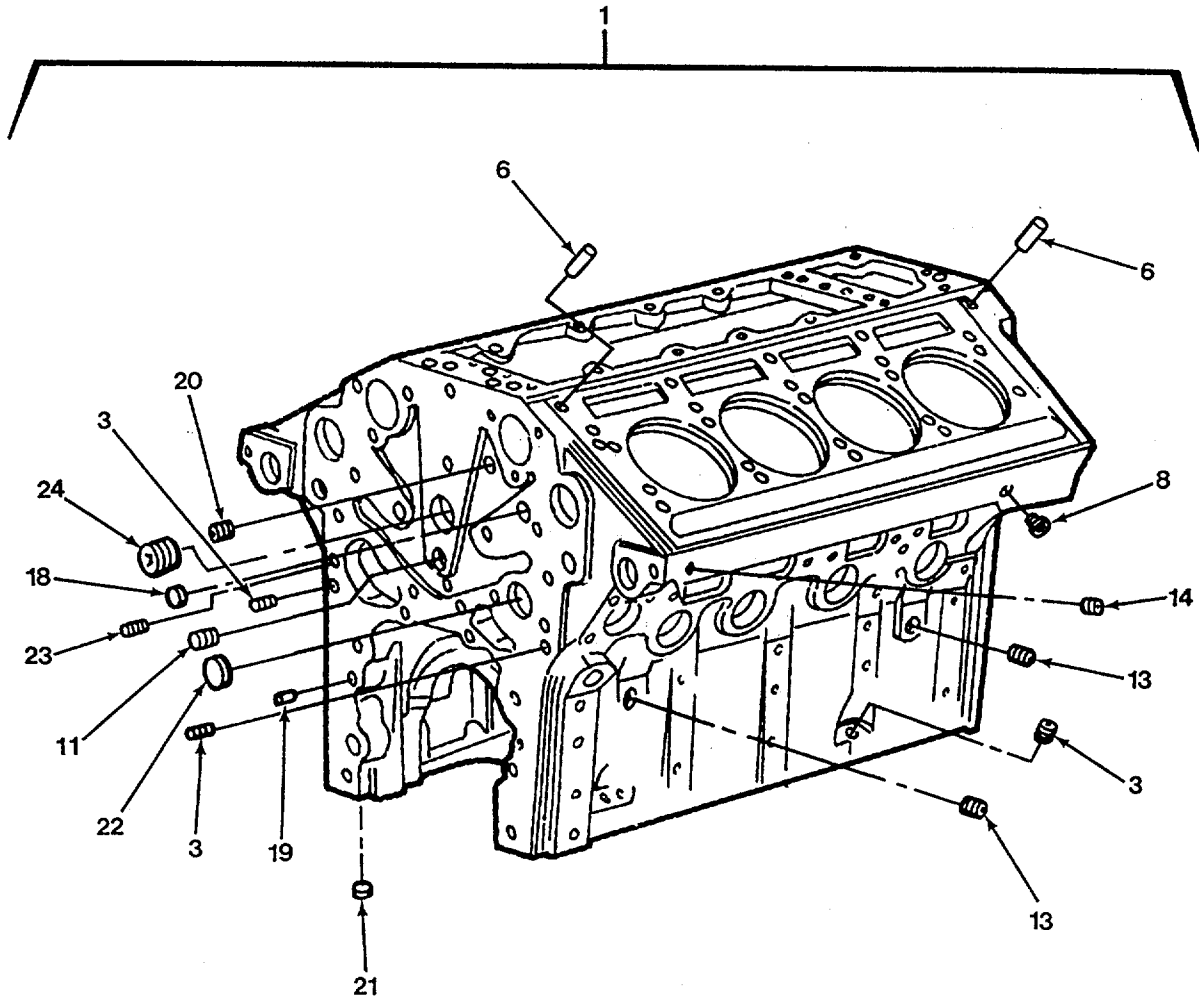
Cylinder Block Assembly, Sheet 2 of 3
